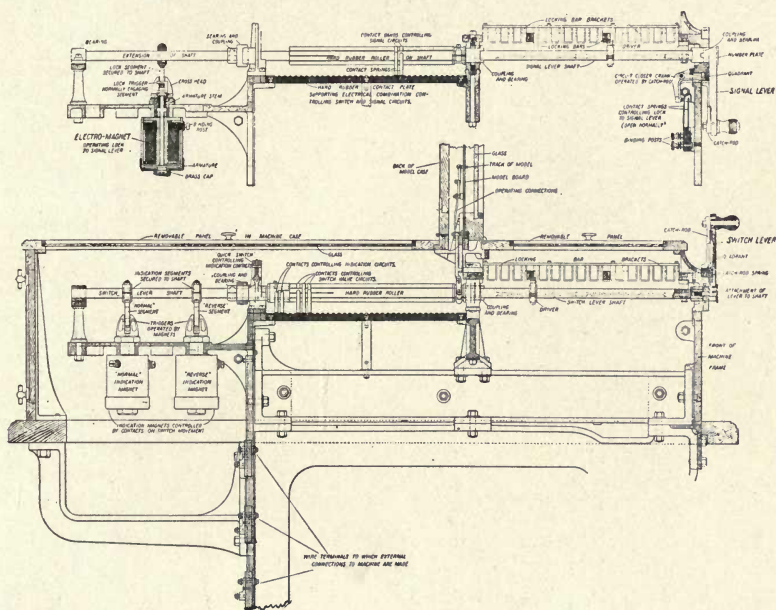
SECTIONAL VIEW OF ELECTRO-PNEUMATIC INTERLOCKING MACHINE
